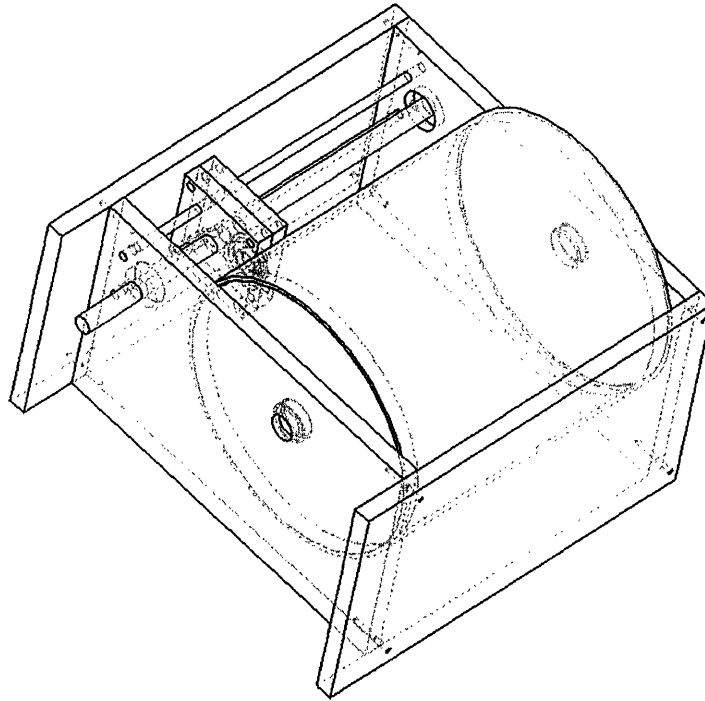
Prototype Drum and Lead Screw Assemblies with Support Structure
